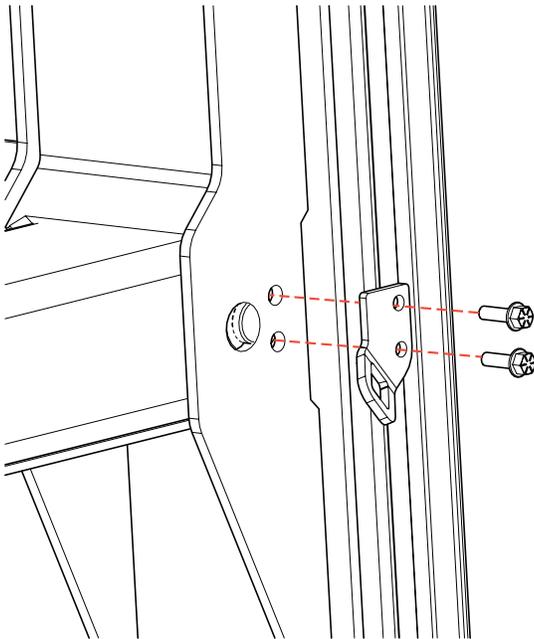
Install the new retainer plate and use the existing bolts to secure it.
